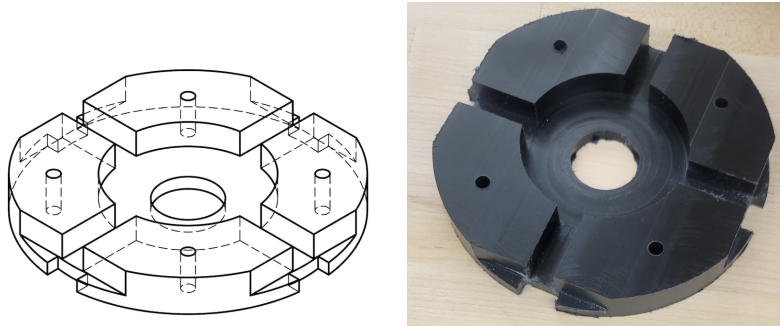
CAD Drawing (left) and as constructed (right) slotted deck
